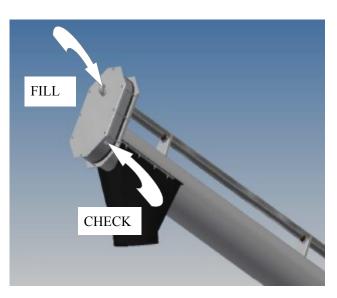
FILL & OIL LEVEL CHECK PLUGS
